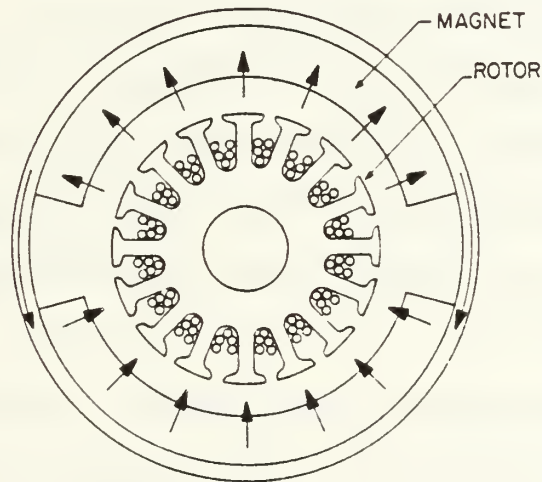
Cut-Away View of Conventional DC Motor Assembly.
